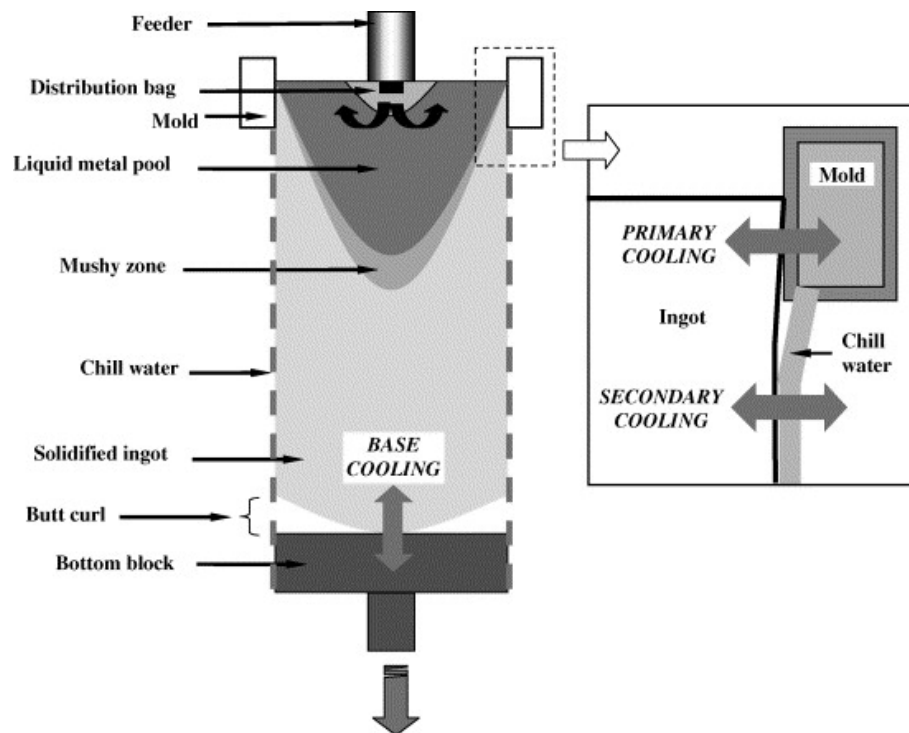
Schematic of the DC casting process for aluminum sheet ingots and various cooling phenomena active during the process [10]
